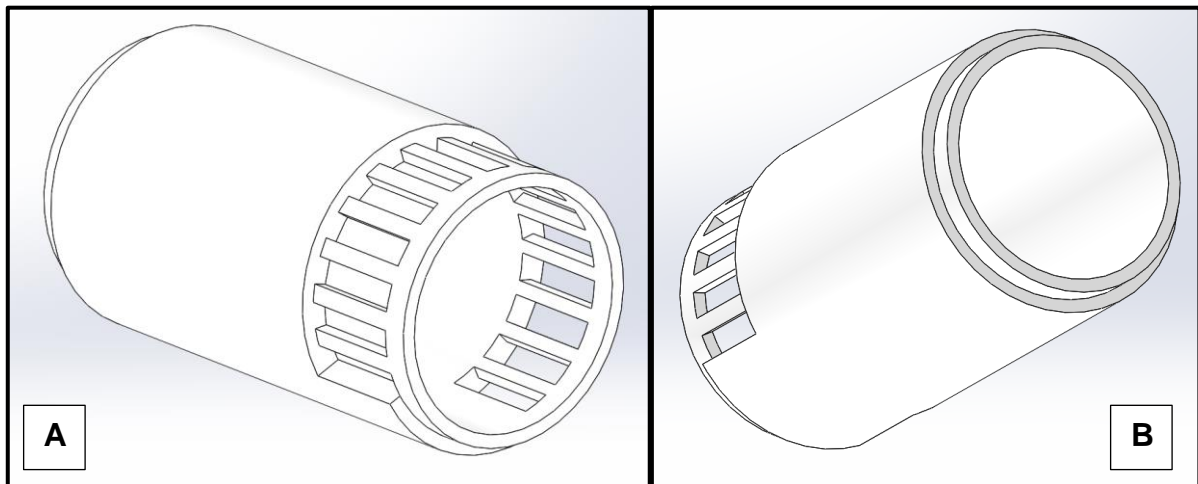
A: New Design solution tube component, CAD-illustration top-side view. B: New Design solution tube component, CAD-illustration bottom-side view.
